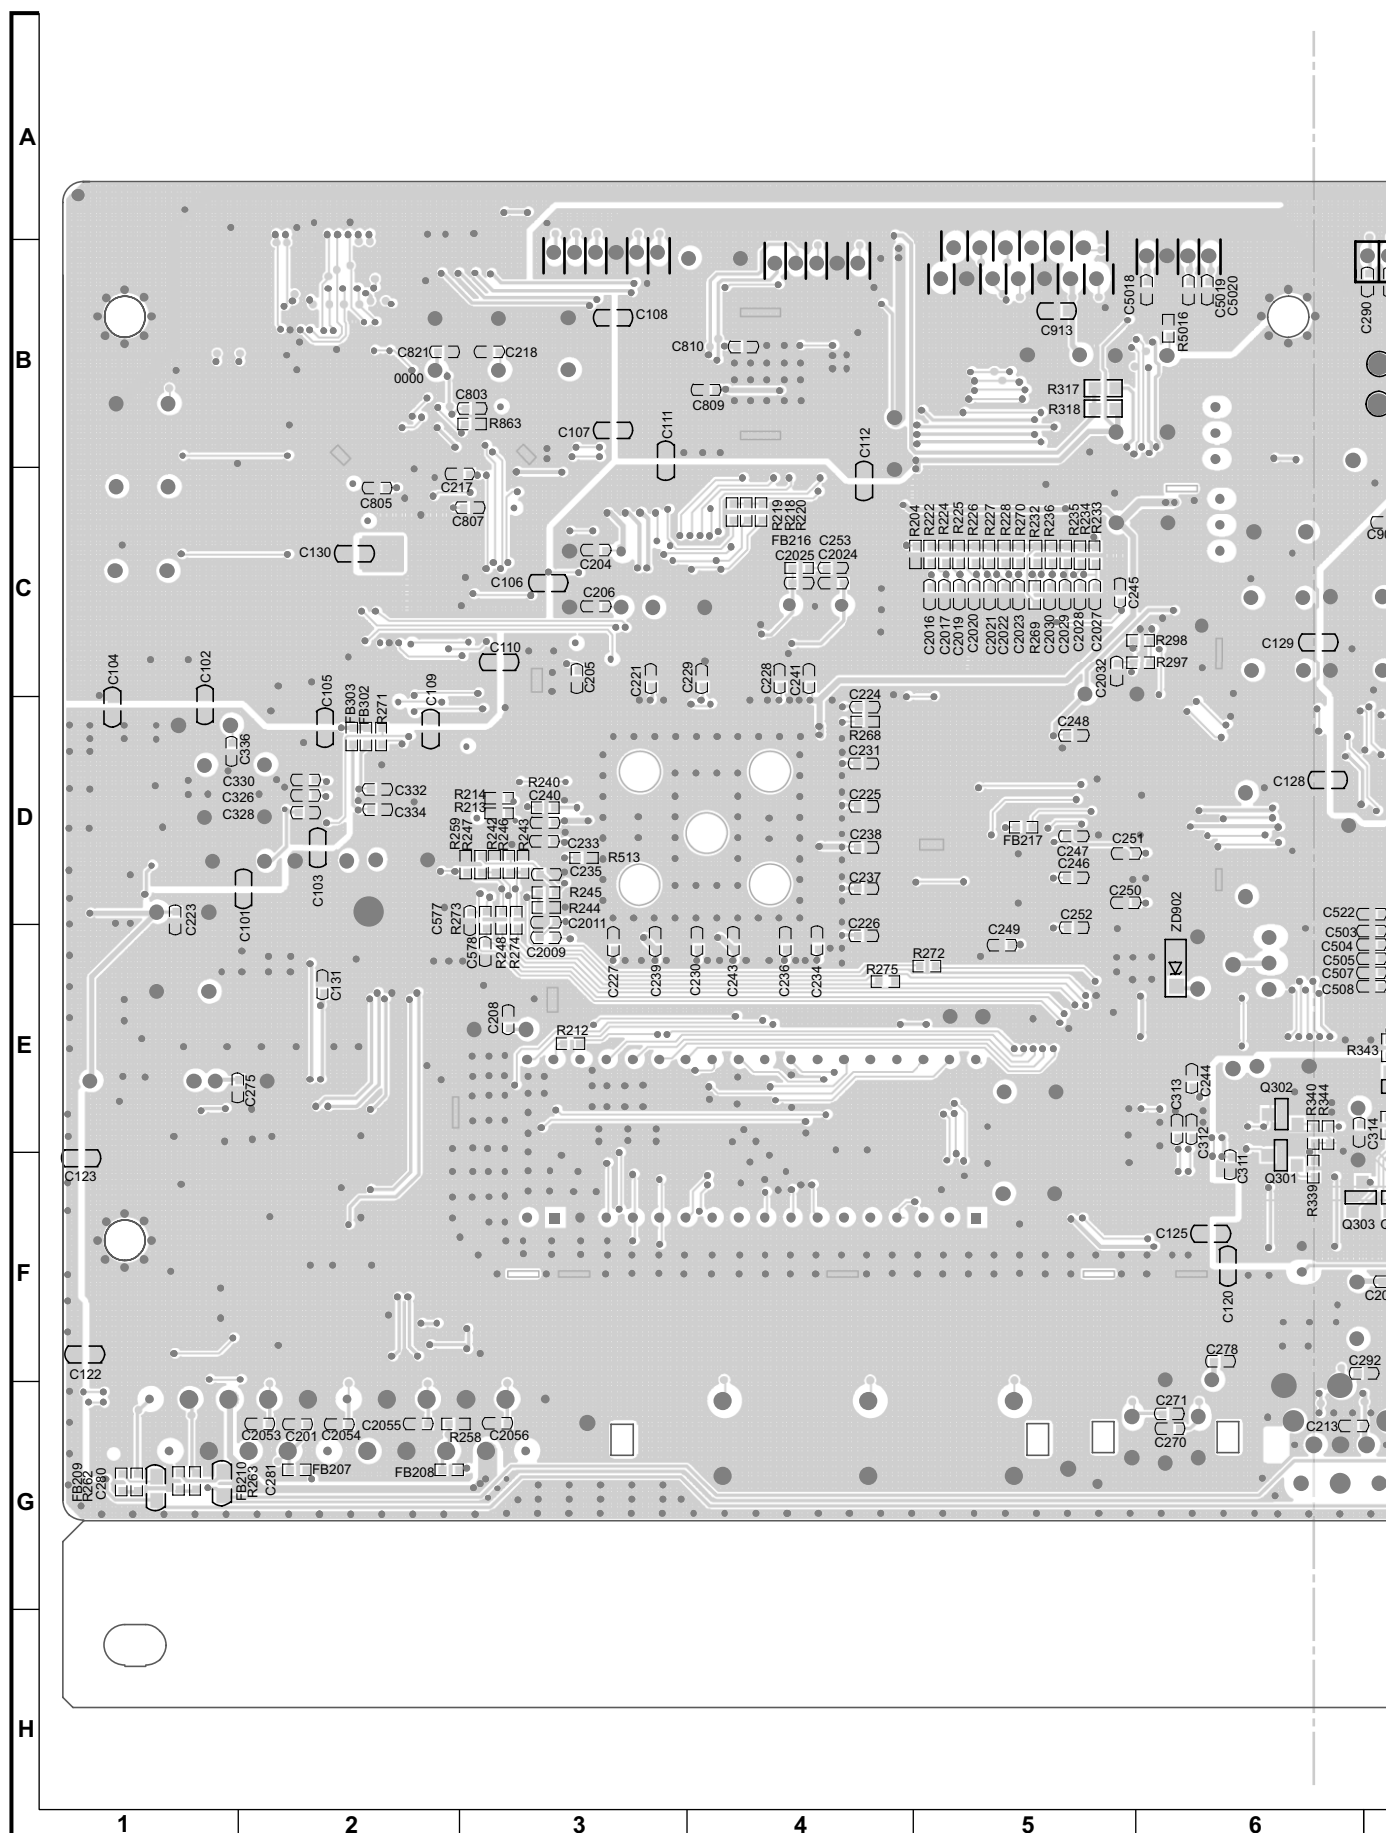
WIRING SIDE OF MAIN PCB (TOP VIEW) (2/2)
